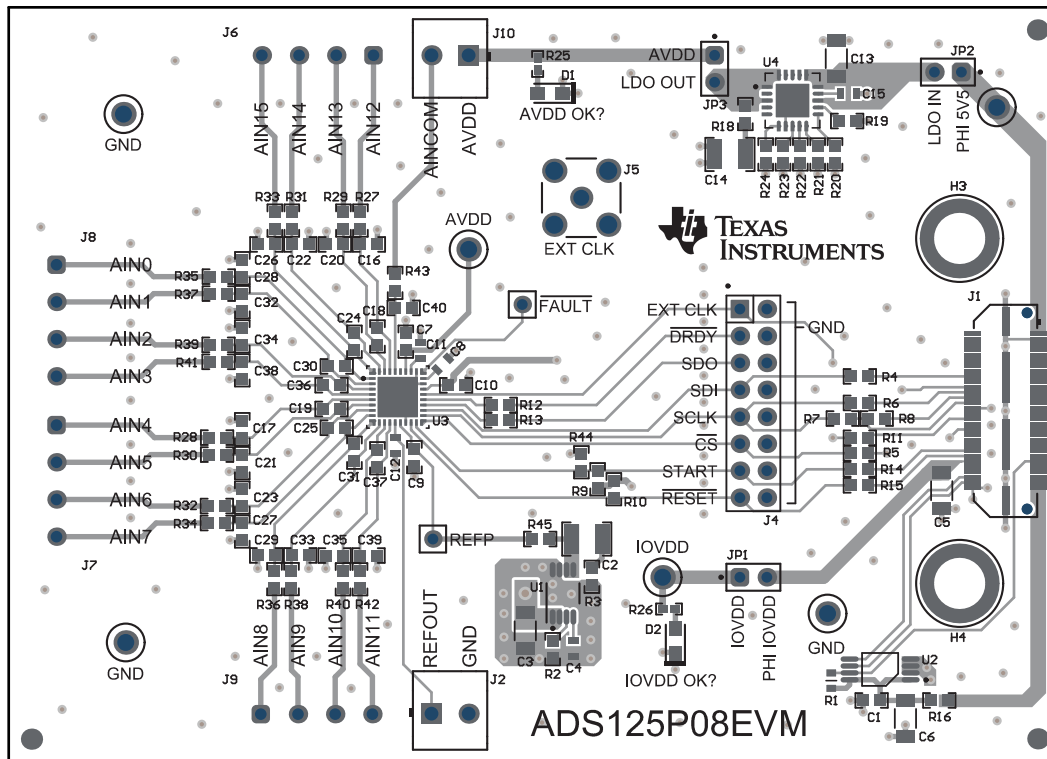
ADS125P08 EVM PCB Layout - Top Layer
